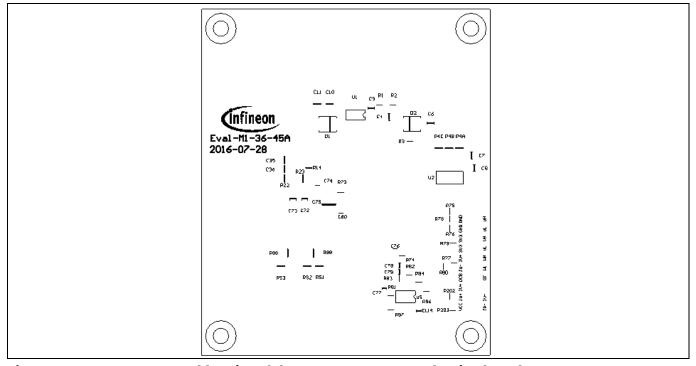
Bottom assembly print of the EVAL-M1-36-45A evaluation board
